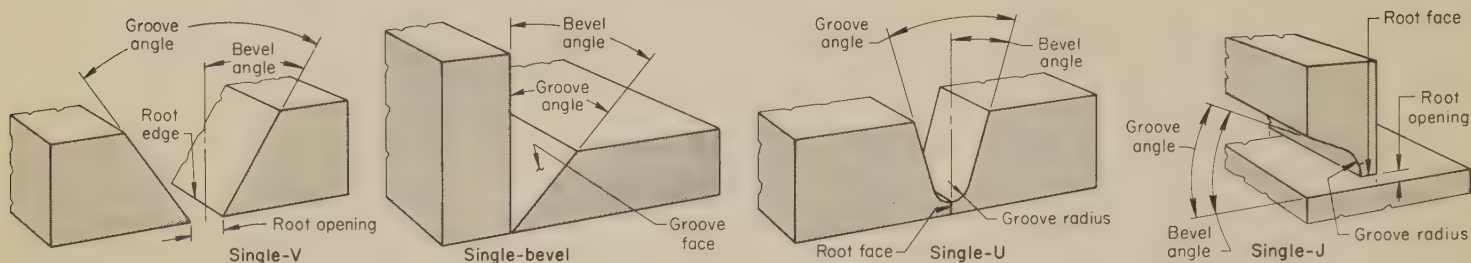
Nomenclature for four standard types of single-groove joints frequently used in shielded metal-arc welding
